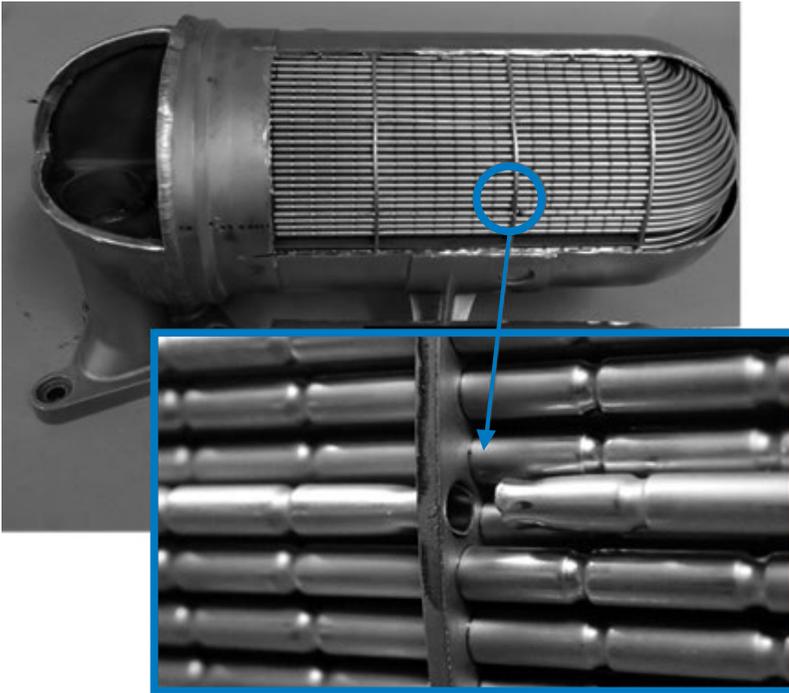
View of cracked tube in the main fuel oil heat exchanger.
